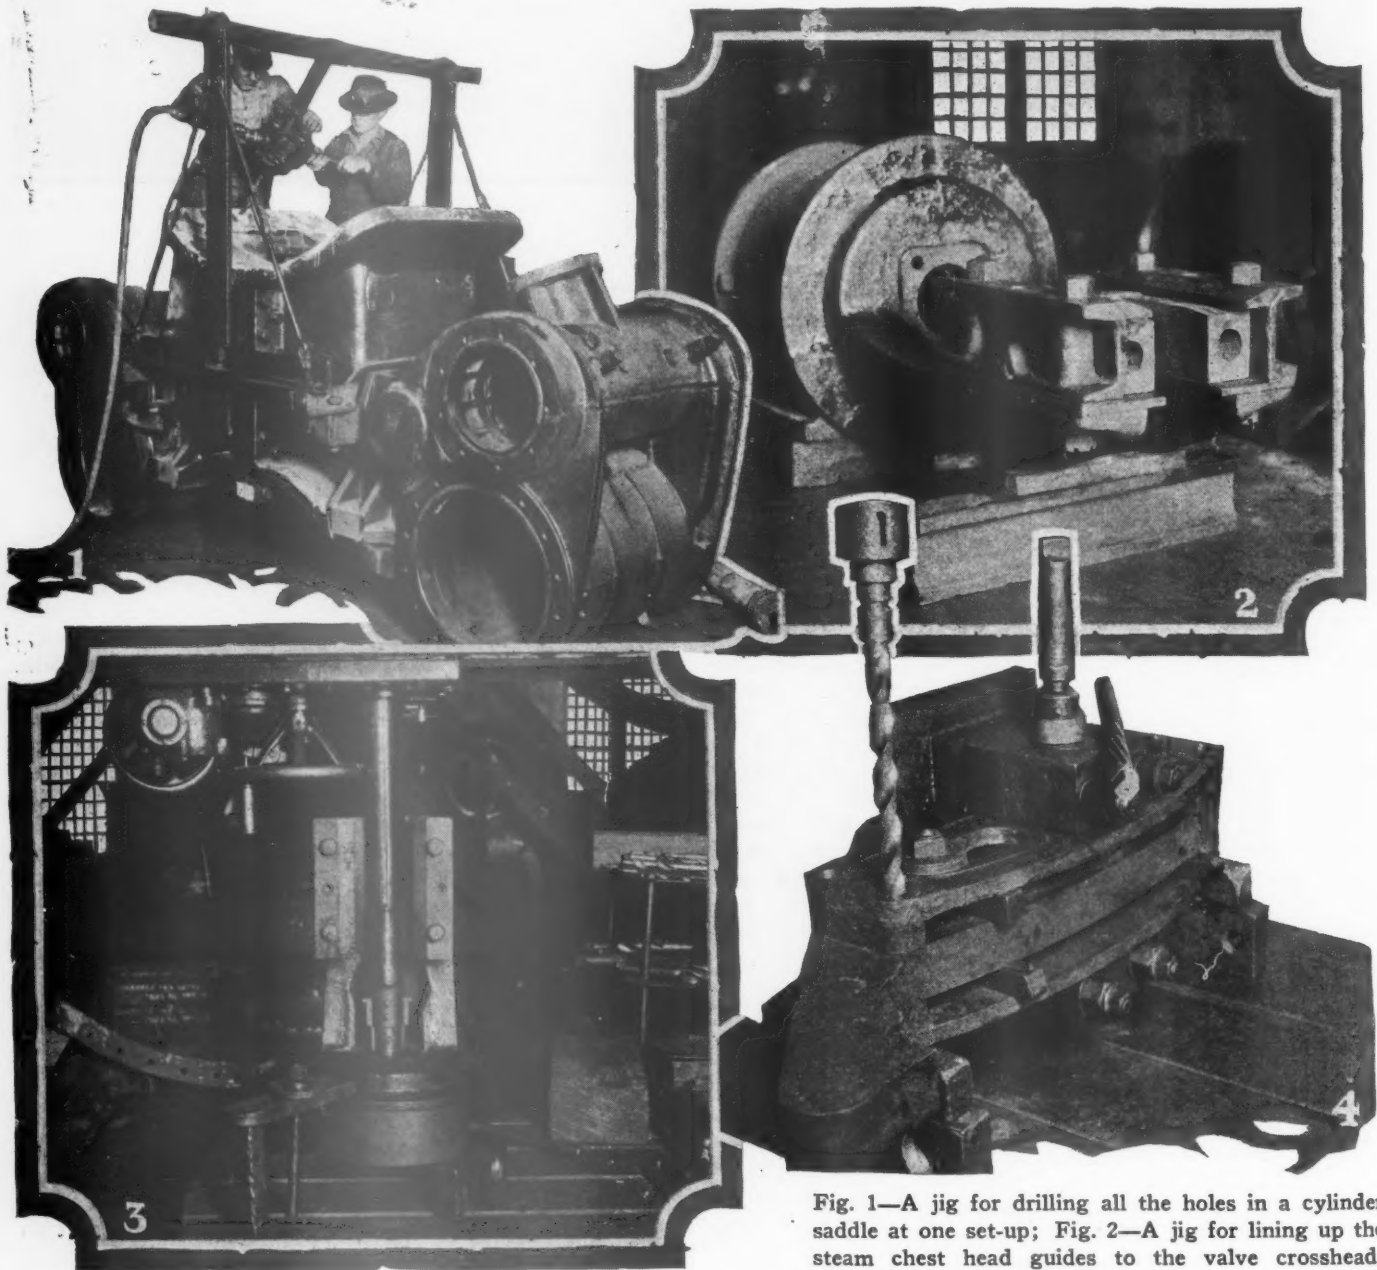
A jig for drilling all the holes in a cylinder saddle at one set-up; Fig. 2—A jig for lining up the steam chest head guides to the valve crosshead; Fig. 3—A jig used for boring out the back valve chamber head stuffing box; Fig. 4—A jig which eliminates considerable lay-off table work when drilling, reaming and fitting the bolts in a Walschaert link
